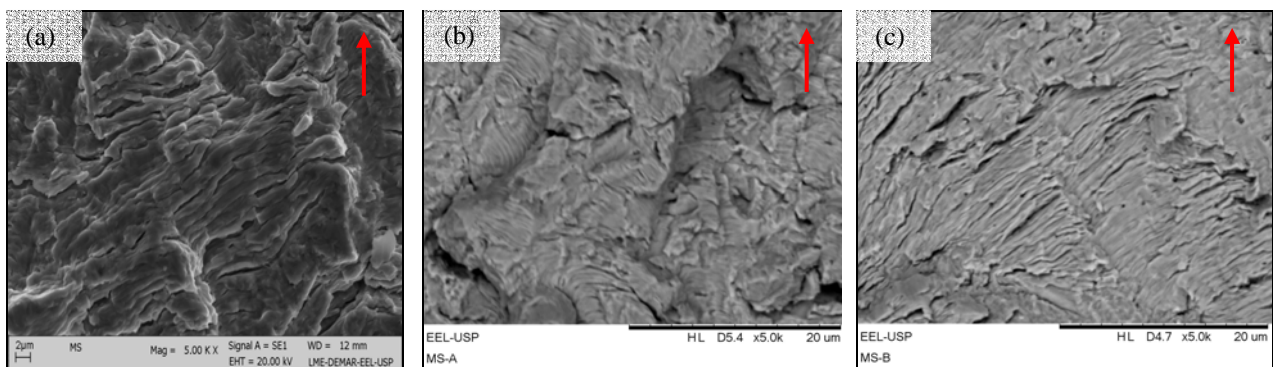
Representative SEM fractographs, B550 steel weld metal: (a) Flash welding; (b) Laser-A; (c) Laser-B (magnification: 5,000 $\times$ ).
